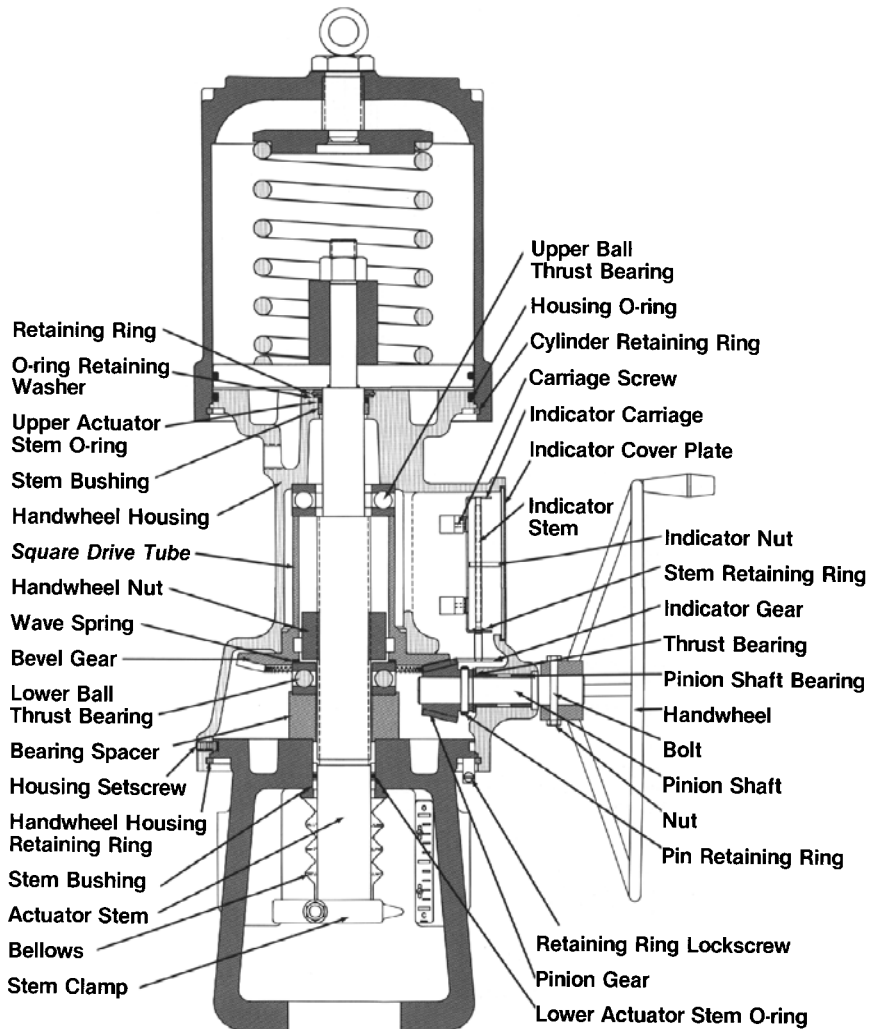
Top-mounted continuously connected handwheel mounted on a linear actuator. (Courtesy of Valtek International)
